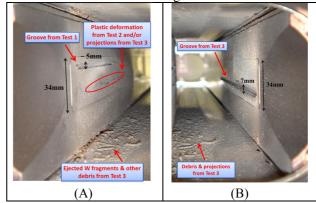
Preliminary visual inspection. (A) Damage on the left jaw caused mainly by Test 1 beam impact. (B) Damage on the right jaw caused by Test 3 beam impact.
